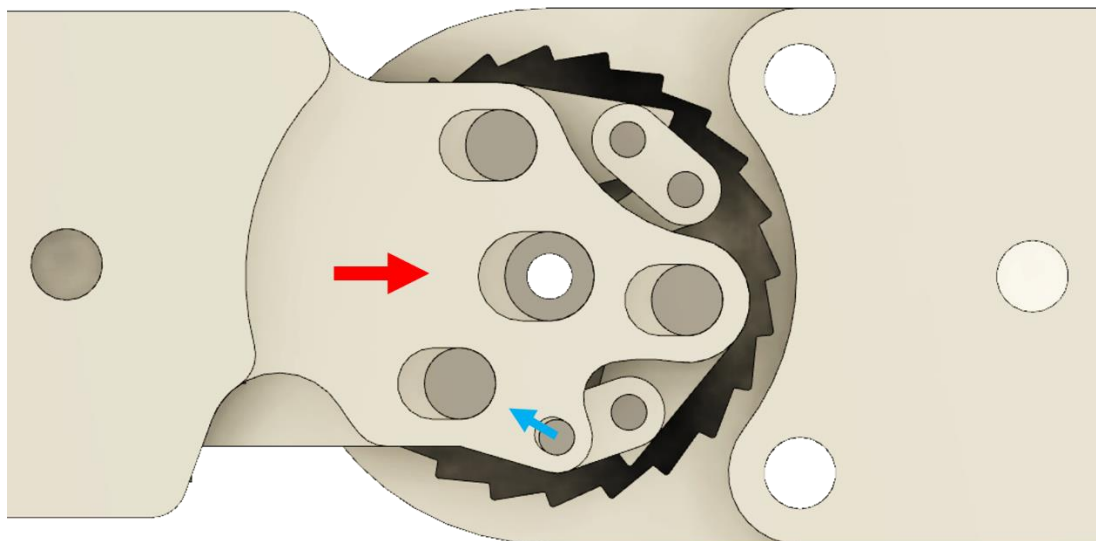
Actuation Mechanism (Red – Actuated, Blue - Locking)
